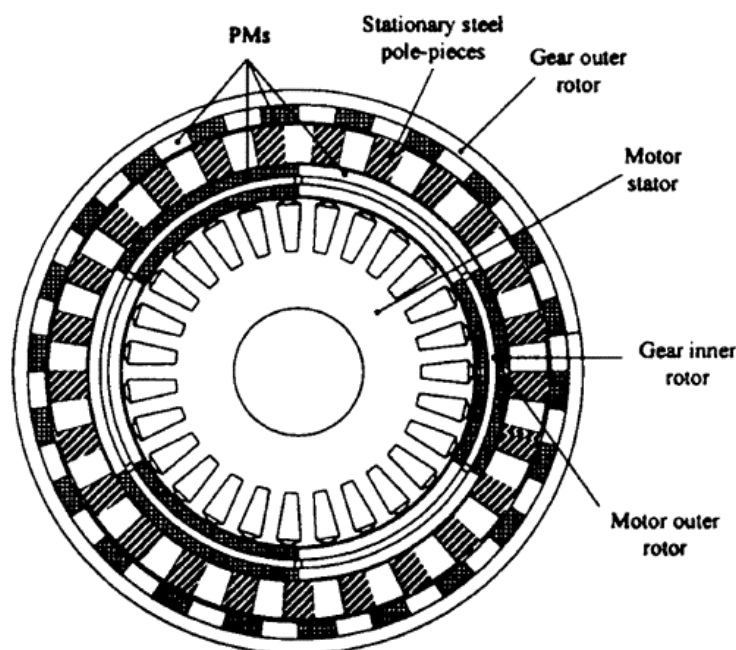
Magnetic Geared PM Machine (with Internal Stator), (19)
